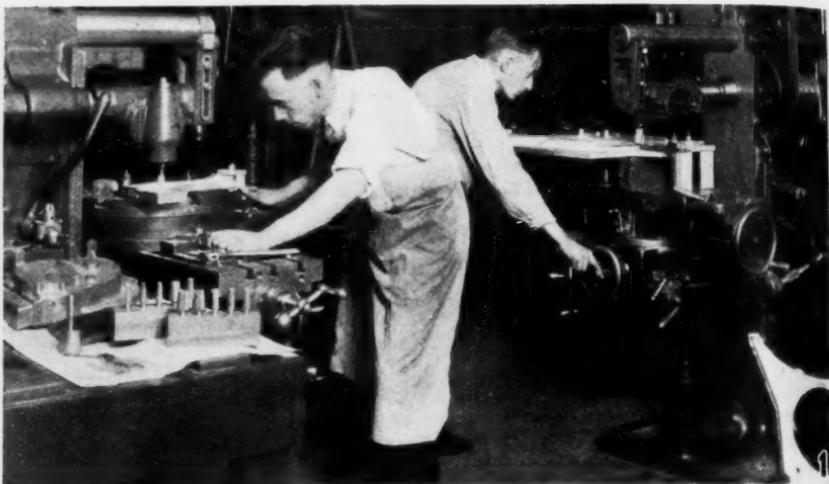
Using horizontal milling machines, equipped with milling attachments, for profiling irregular surfaces on metal patterns.
